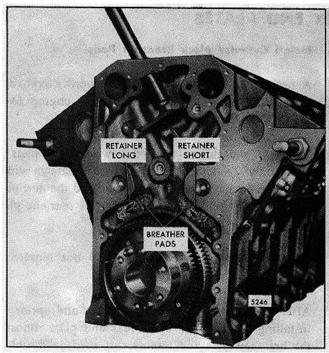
Current Breather Pads and Retainers Installed in Cylinder Block
